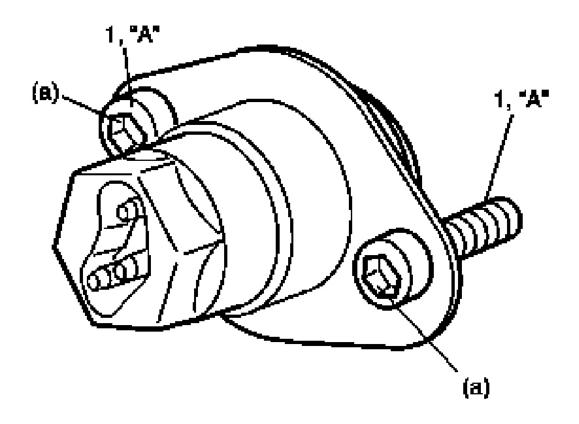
Applying Thread Lock Cement To Block Heater Bolts Courtesy of SUZUKI OF AMERICA CORP.
